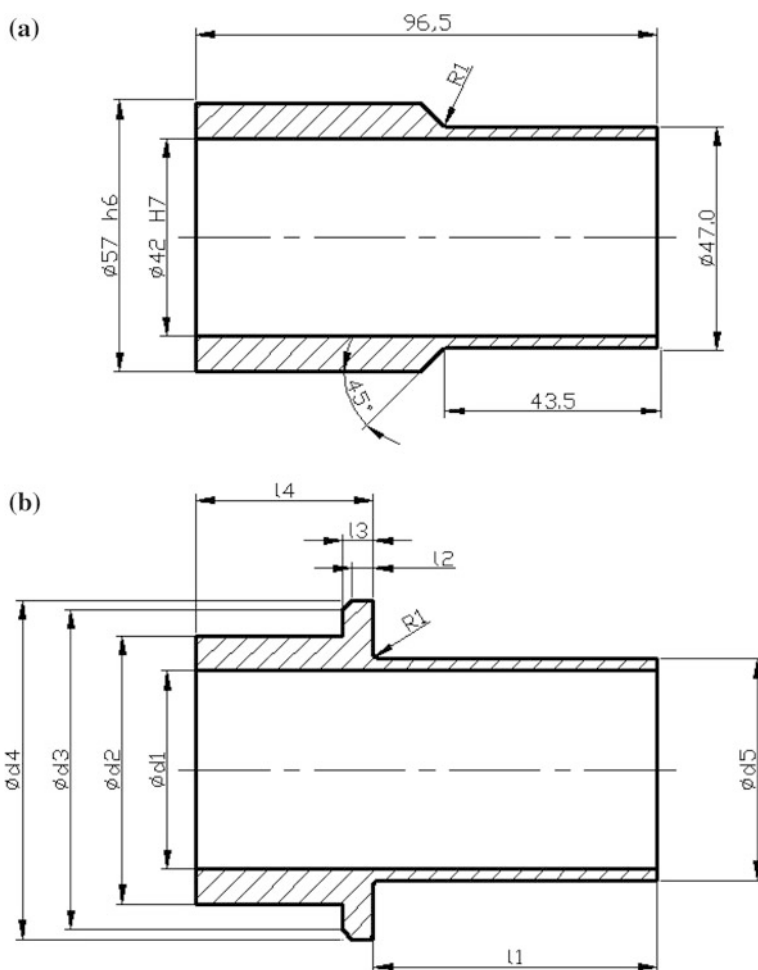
Sketches of pre-machined blank (a) and rotary forged part (b)
